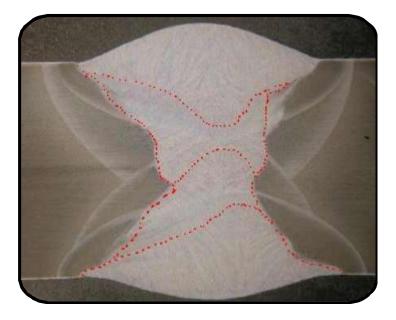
Tandem GMA weld macro cross section, dashed lines outline weld passes
